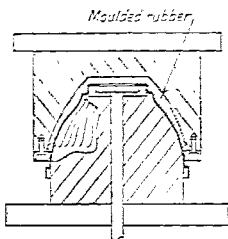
Molded rubber expanding die for lighting reflector. (General Electric Co.)
